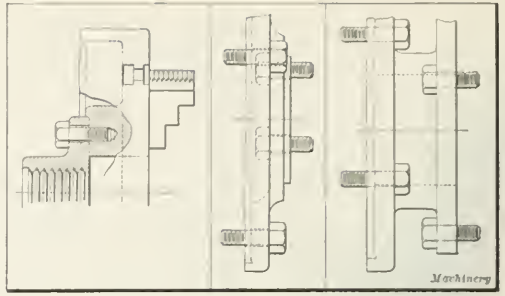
Ordinary Way of fitting Chuck to Lathe Spindle with Adapter
